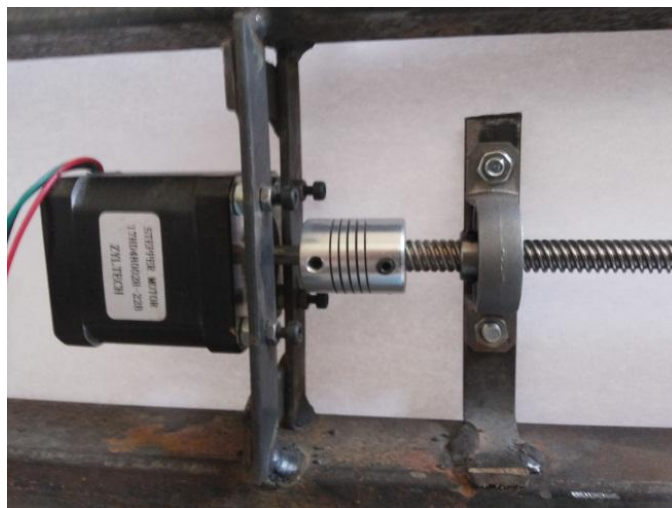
stepper motor coupled with lead screw by flexible shaft coupling
